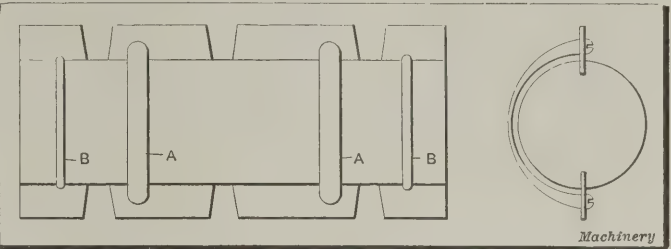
Mandrel for babbitting Ring Oiling Bearings
